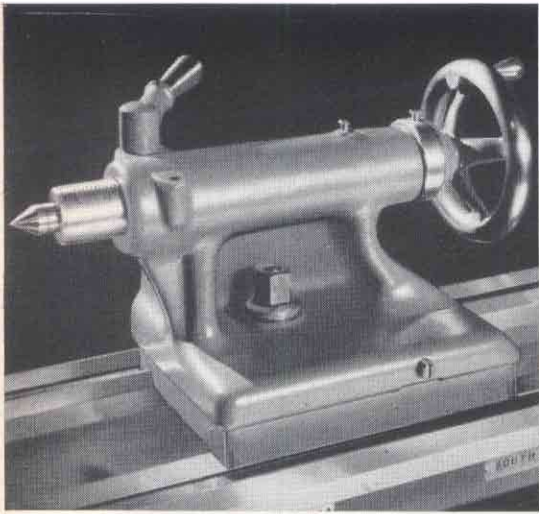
Tailstock Design Used on 13" and Larger Lathes
